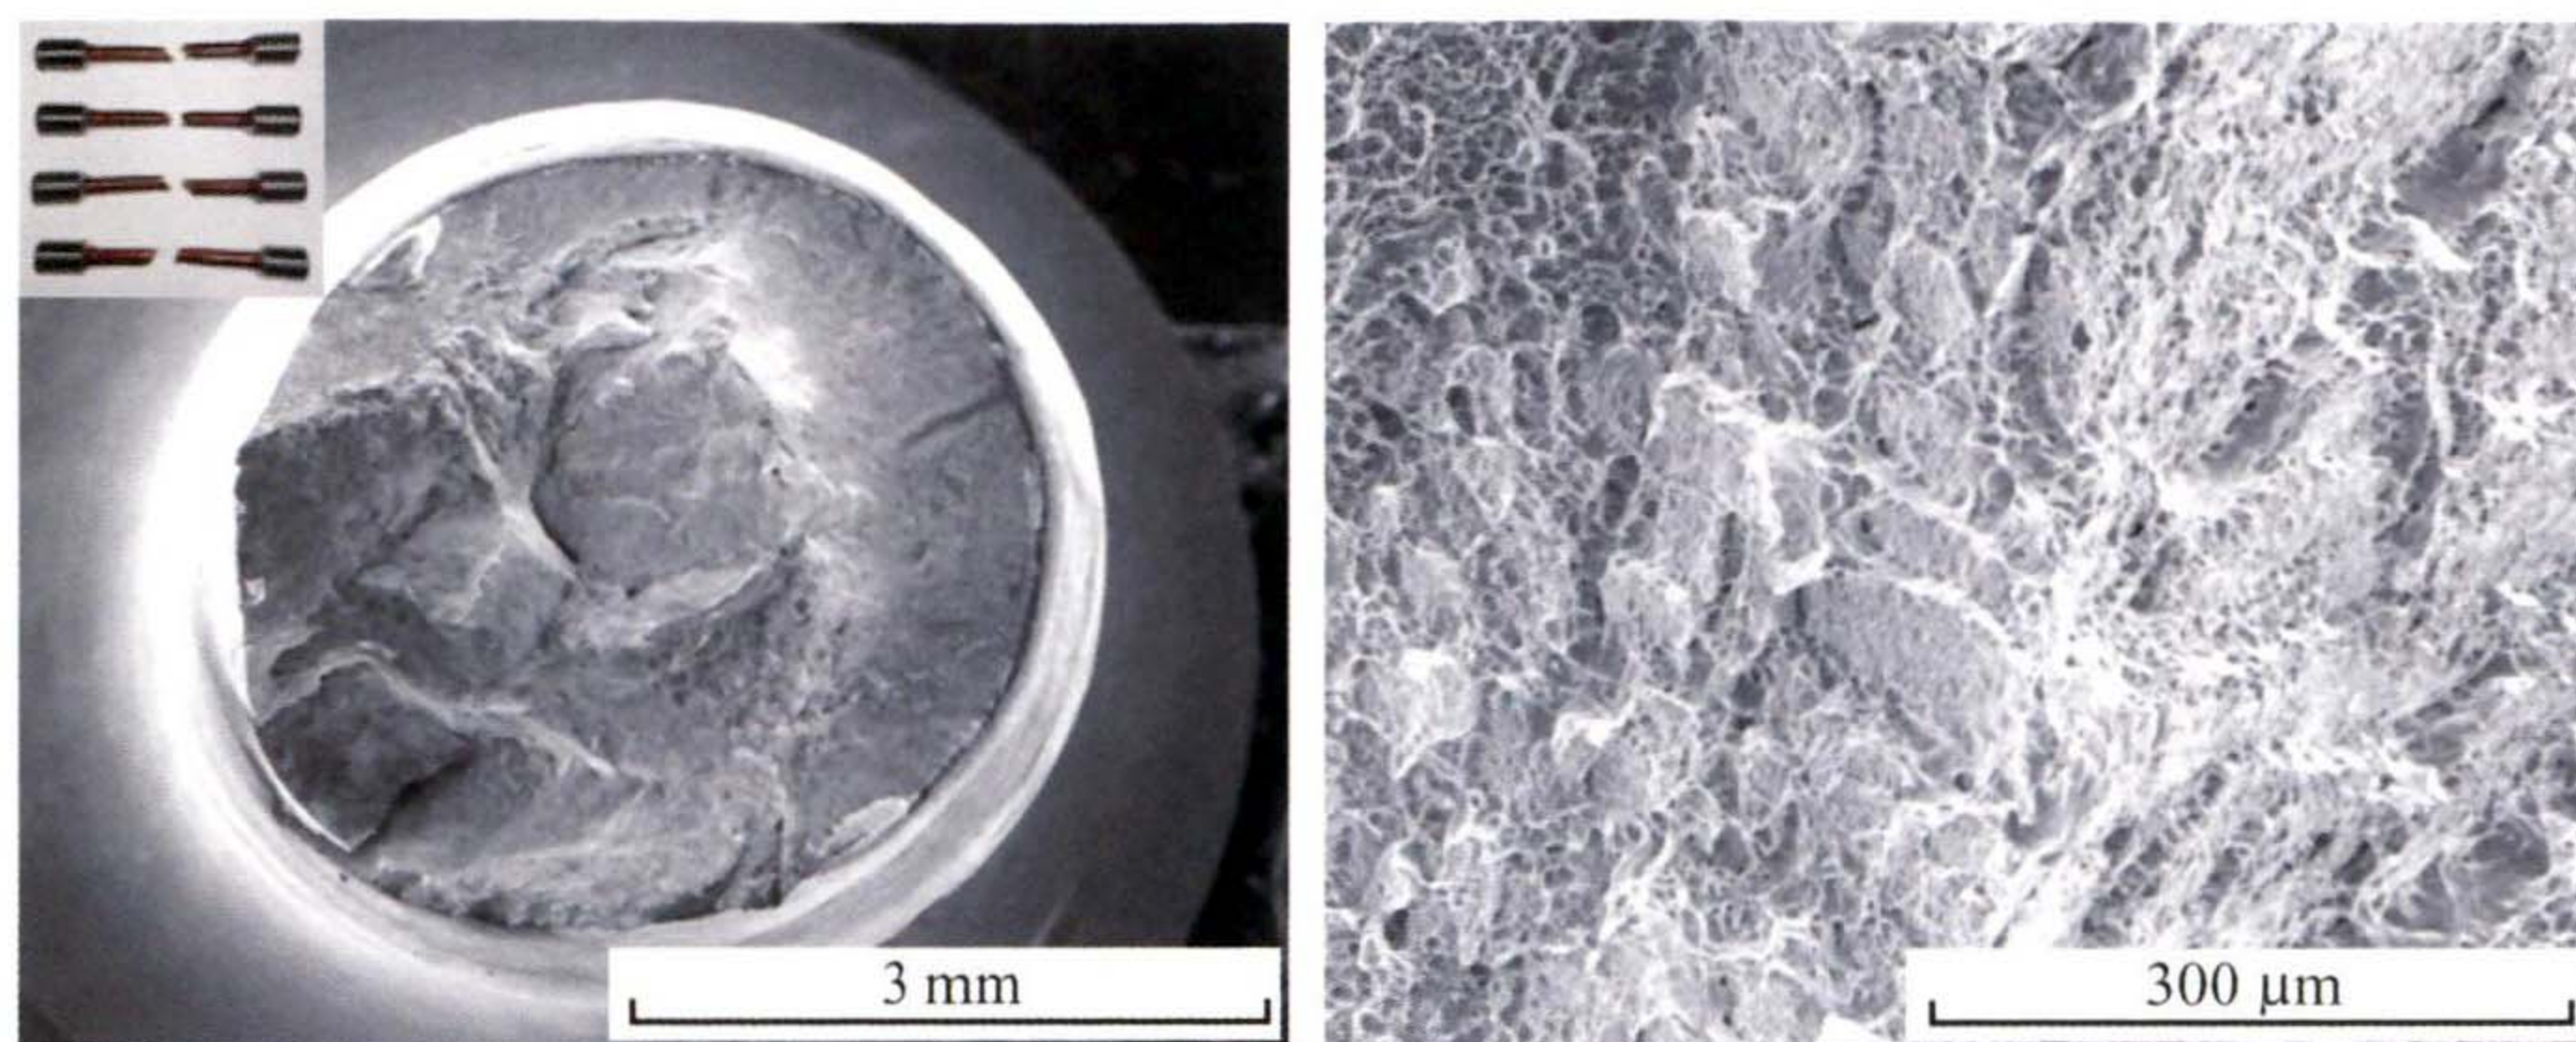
Fracture surface of the tensile sample of the welded joint
